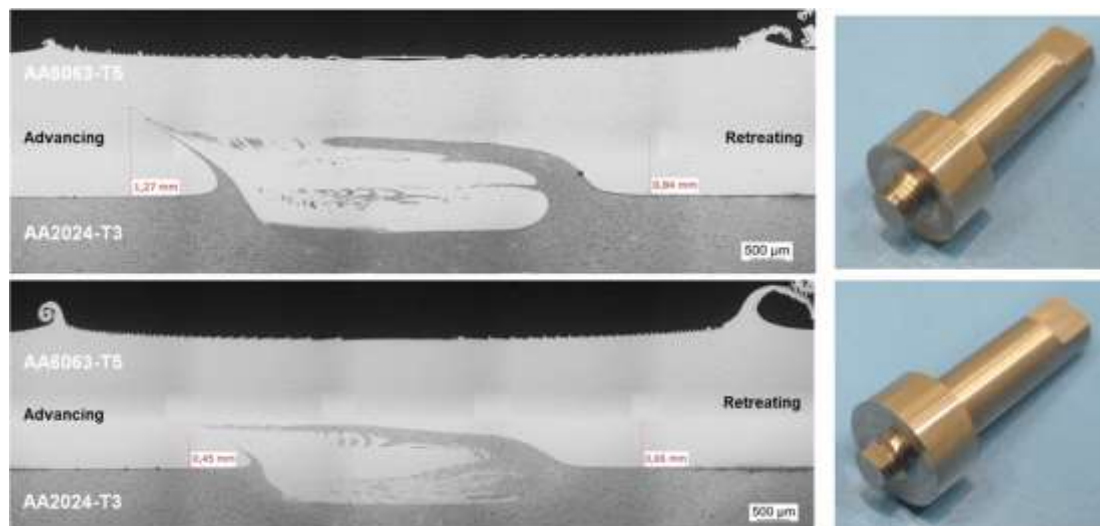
Macrosections and FSW tool-probes used for FSLW tests; cylindrical threaded tool-probe (top) and tool-probe with three flats and mixed thread (bottom) [71].
